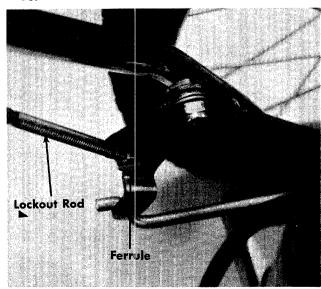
LOCKOUT ROD ADJUSTMENT
